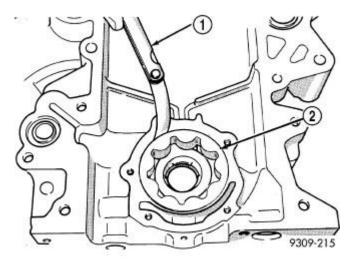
Measuring Outer Rotor Clearance in Housing Courtesy of CHRYSLER LLC
